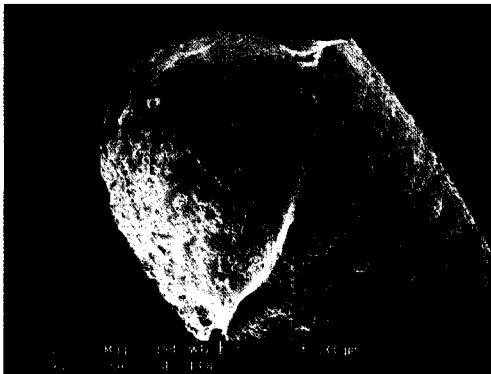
Cross-section of a typical pit (220A-23V-100cm/min)
